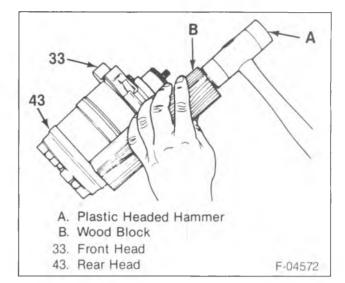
Tapping the Front or Rear Head Free of the Cylinder
